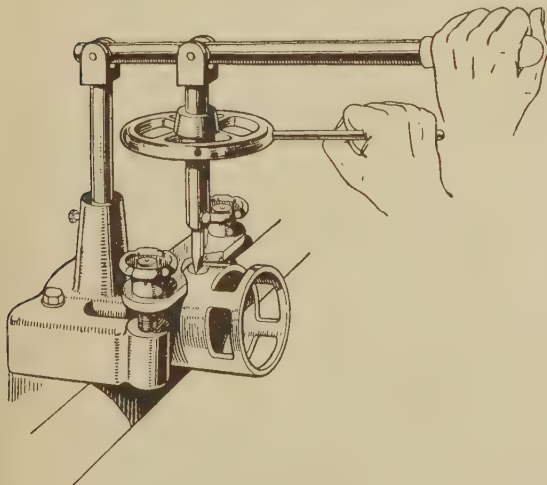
Wheel-operated Screw-driver for the pole Pieces Attachment Screws.
